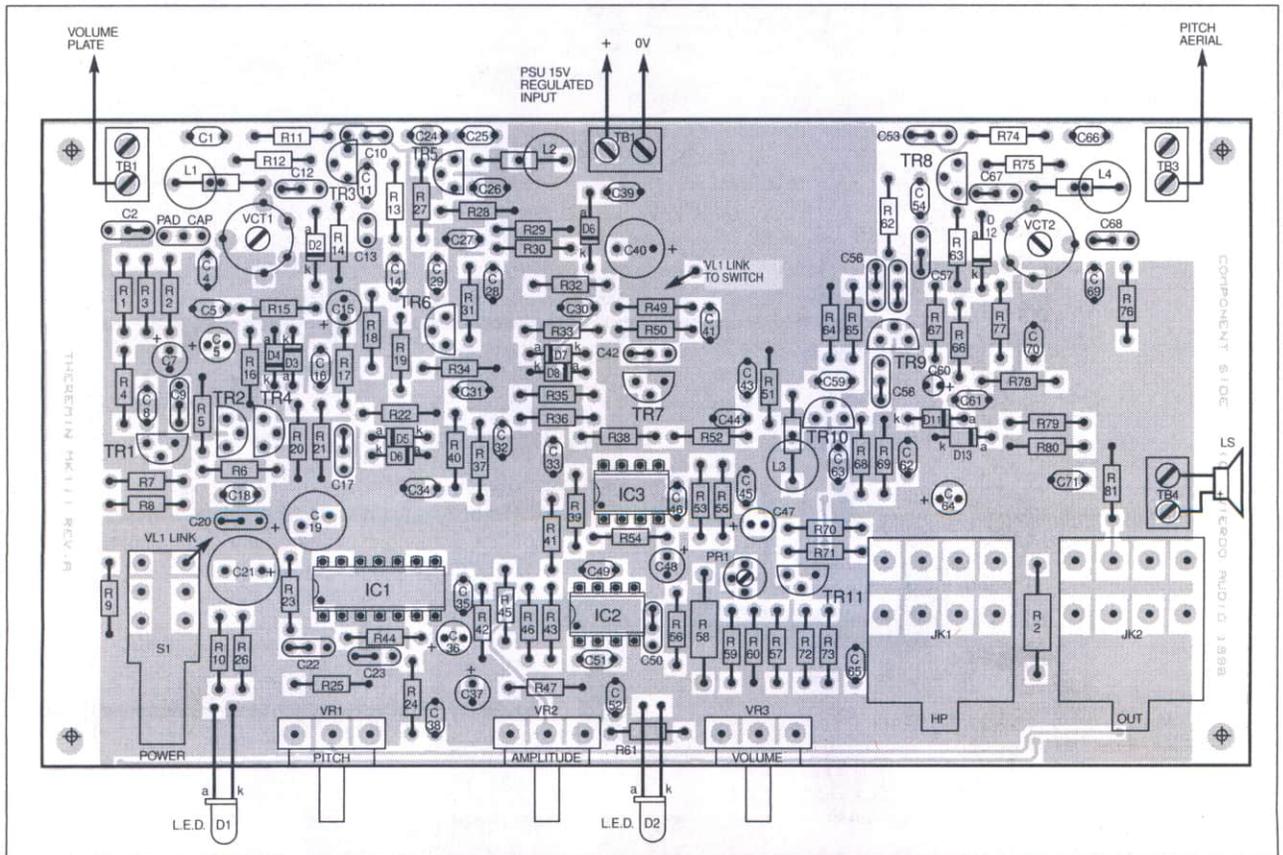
Printed circuit board component layout. This is a double-sided p.t.h. board.
